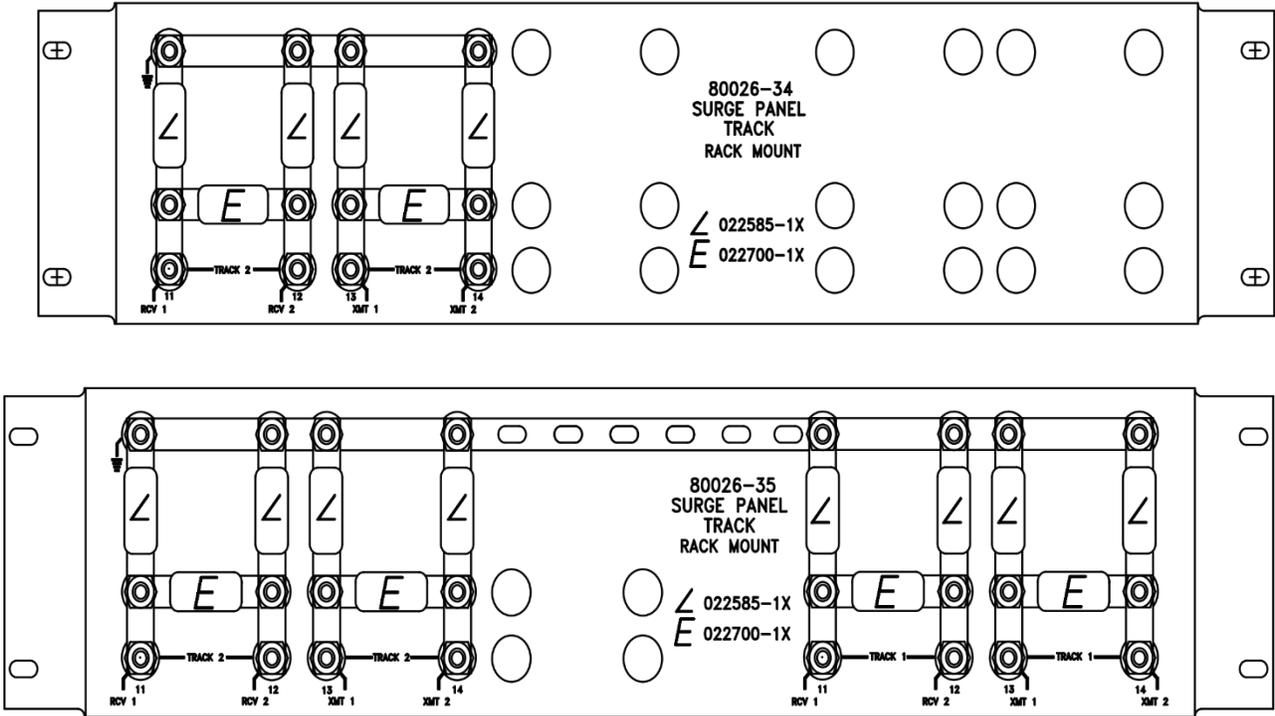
Rack Mounted Surge Panels, 80026-34 and -35
